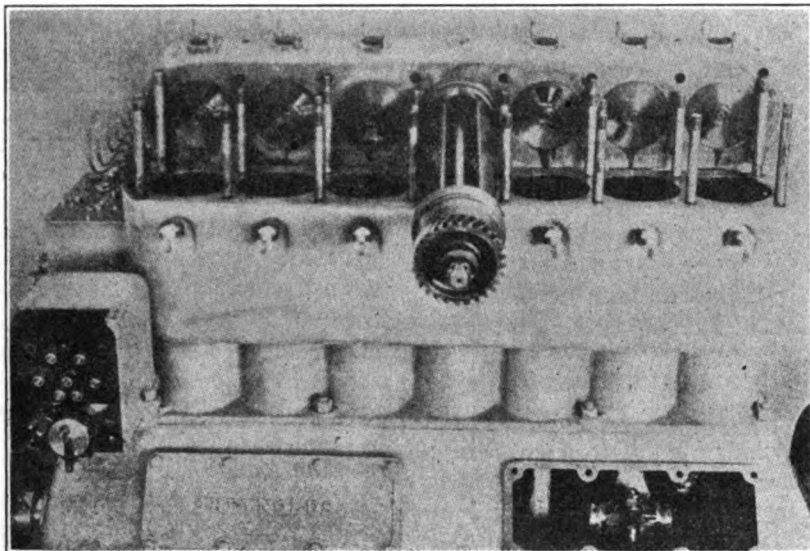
SHOWING THE REYNOLD'S MOTOR PARTIALLY ASSEMBLED
